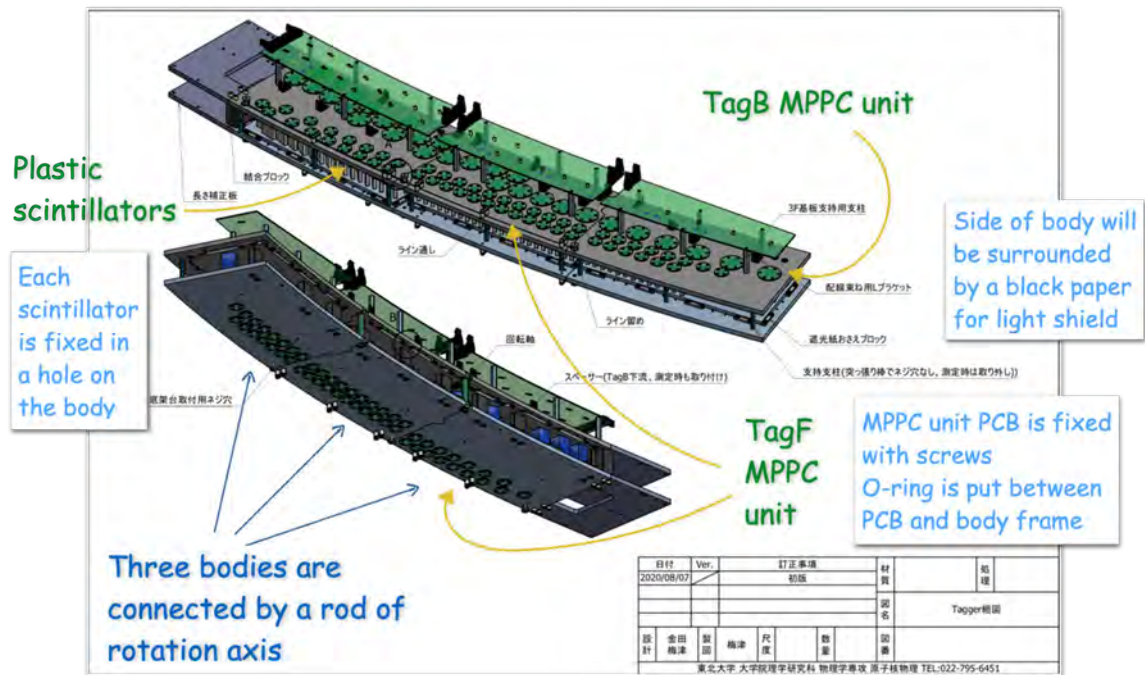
Assembly drawing of the tagger frame. The design was done using three-dimensional CAD.
